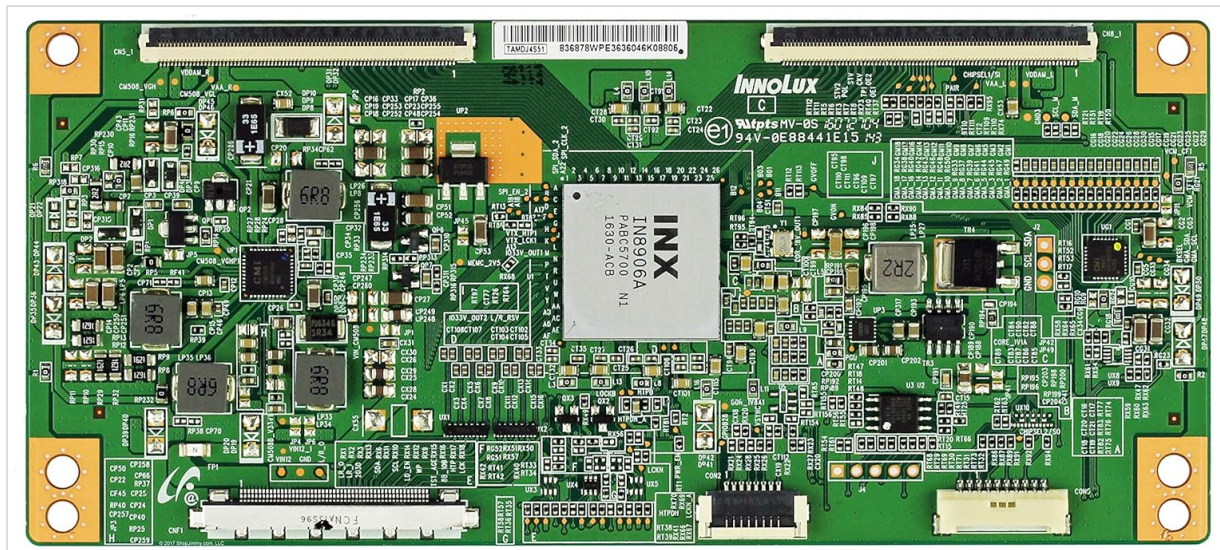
Top view of the SHARP TV LC-65N7000U T-CON Board 1146021. This image displays the component side of the board, showing various integrated circuits, capacitors, resistors, and connectors. Key identifiers such as 'INNO LUX' and 'TNB9006' are visible, confirming the board's model and manufacturer. The LVDS input connector and multiple ribbon cable outputs to the display panel are also clearly depicted.
